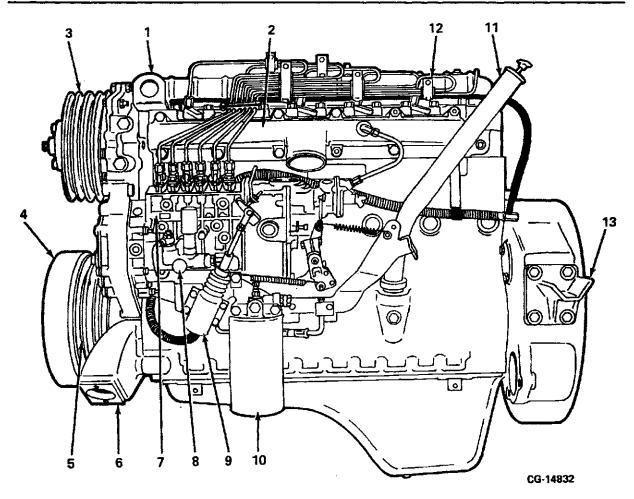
Major Component Location ( Left Side) (DTA-360 Shown w/Intake Manifold For Engines Without PTO)
